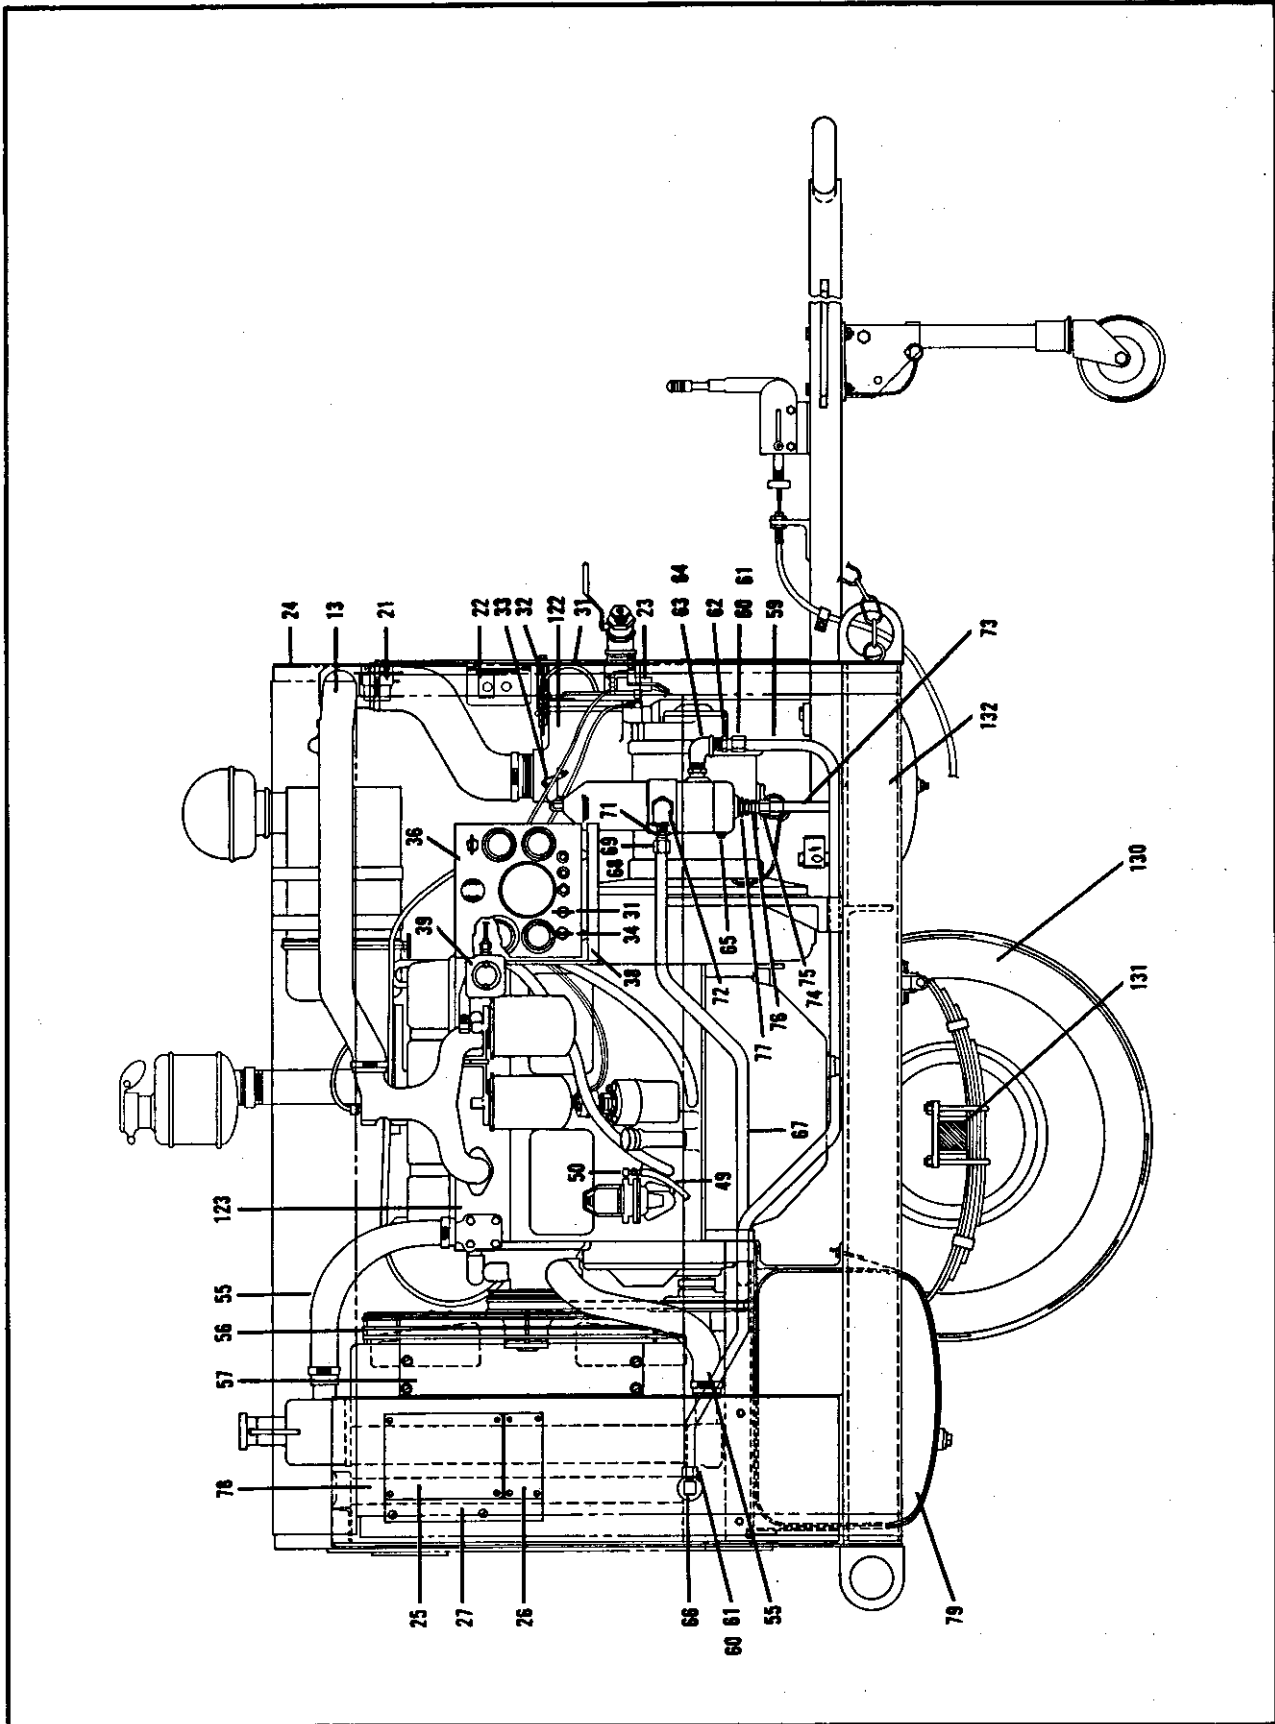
Compressor unit assembly, Model 4M125PVC (Sheet 2 of 4).
